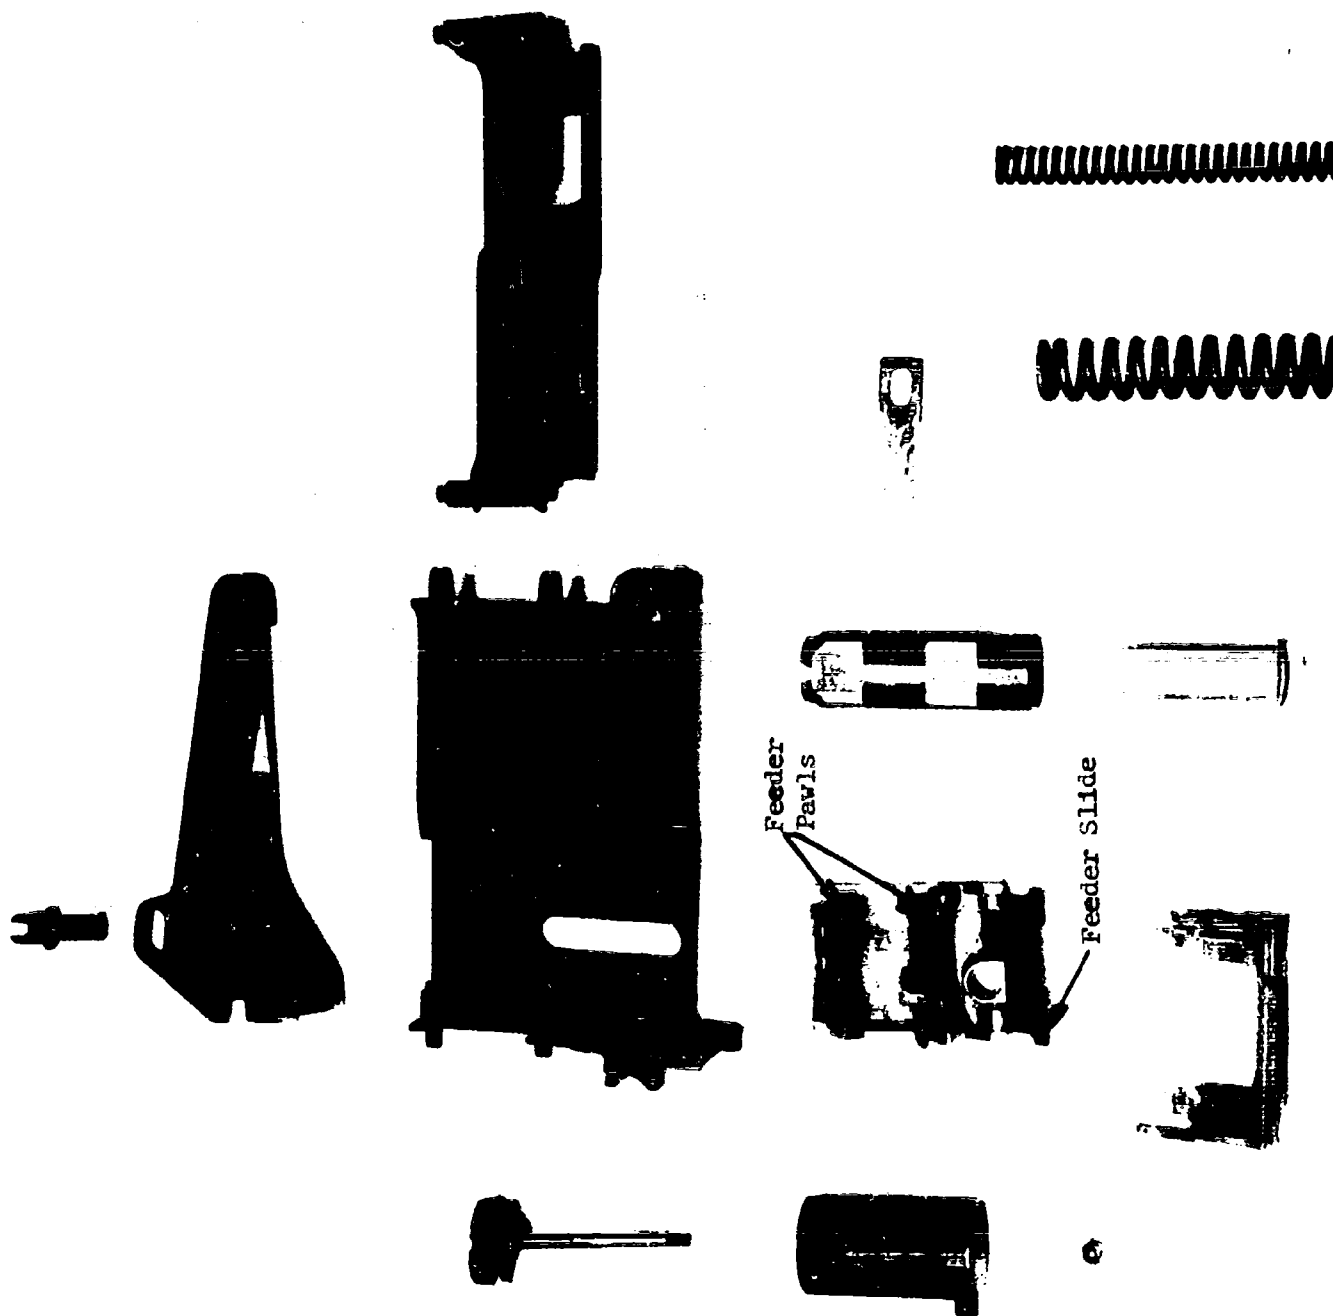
FEEDER FOR 37MM NS GUN, DISASSEMBLED
